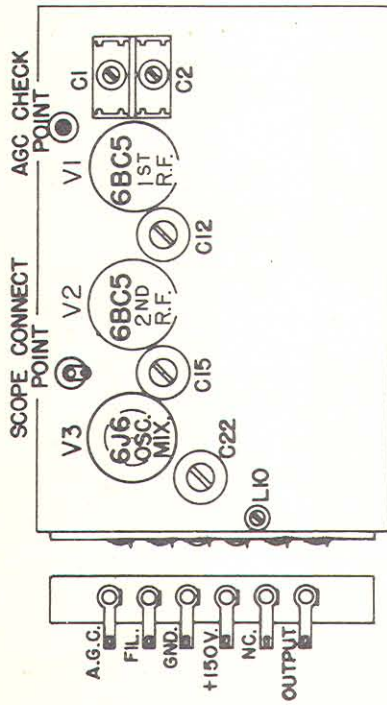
CHASSIS BOTTOM LAYOUT (C18)
